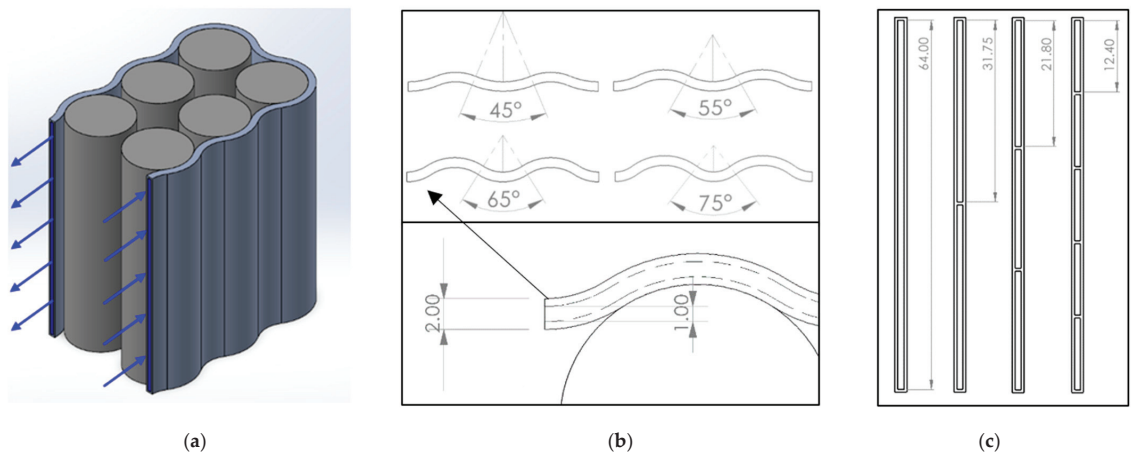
HFD views and dimensions (mm): (a) HFD isometric view; (b) top view and dimensions, with an arrow showing the detailed view; (c) front view dimensions of the inlet/outlet fluid domains.
